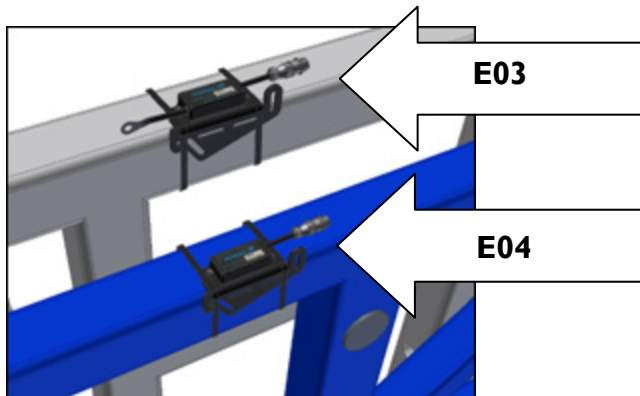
Boom and Chassis Roll Sensors Correctly Mounted
